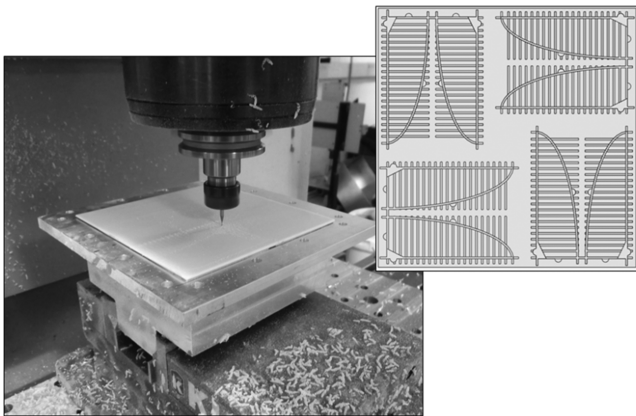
PTFE sheet is milled with channels for use in machined mold method (a subtractive machining process).
